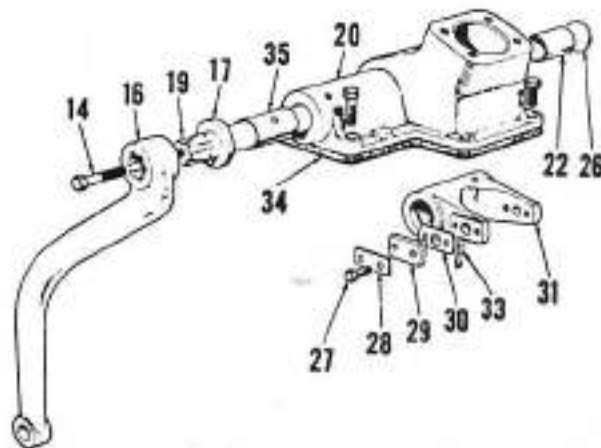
Exploded view of Model 885 and 885N steering gear housing, cross shaft and steering (drop) arm. Shims (30) are provided to adjust ball nut peg (29) preload against ball nut.
